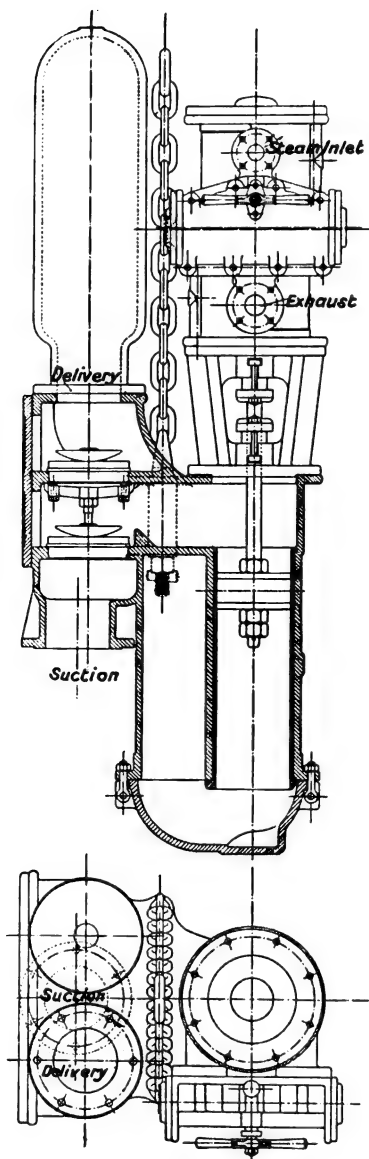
Evans' sinking vertical Cornish steam pump, with removable cast-iron liner.
